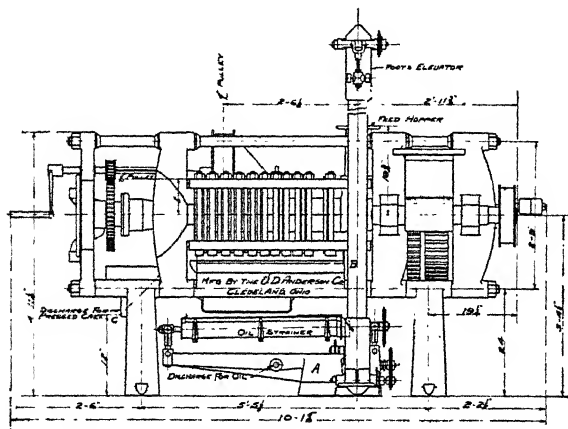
DIMENSIONS OF STANDARD EXPELLER.
